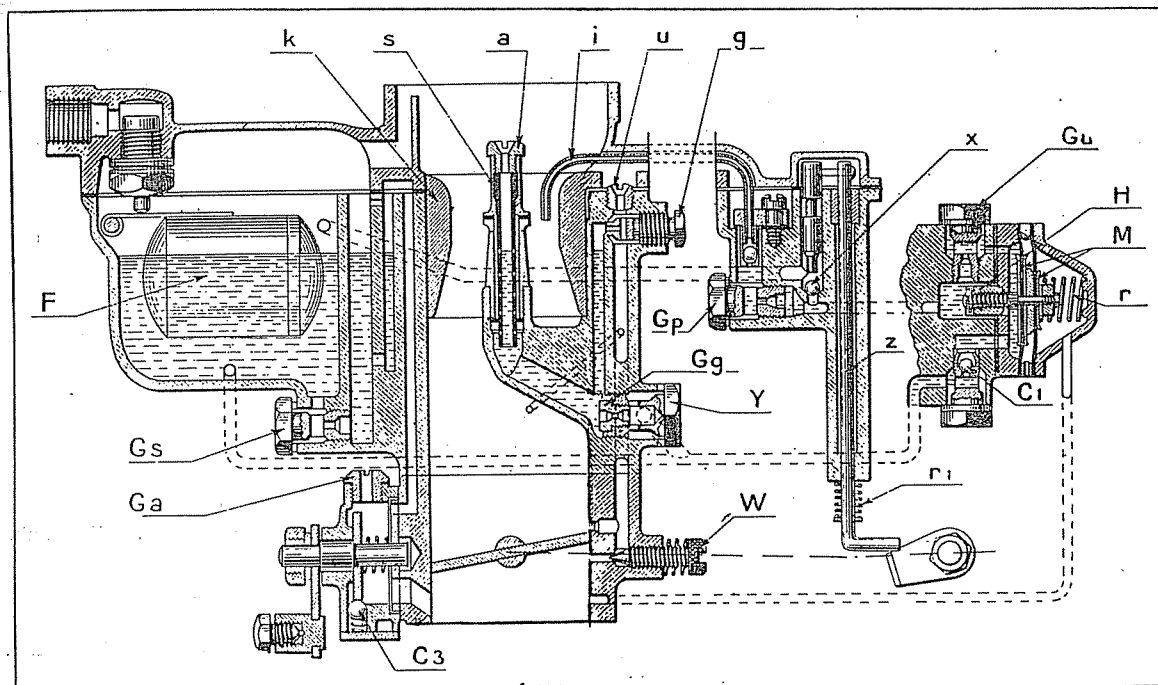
Solex Carburettor as fitted to Kew Series Engines.
